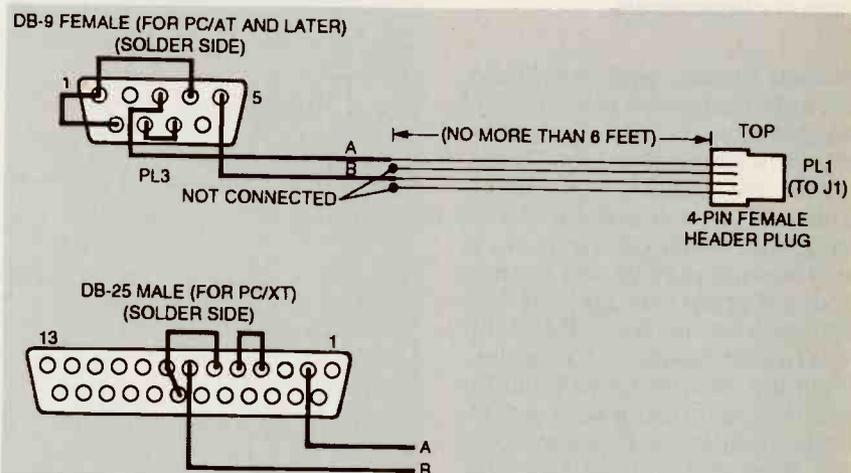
SERIAL DOWNLOADING CABLE. Install a DB-25 male connector on one end of this assembly and a 4-pin female header plug on the other end,
